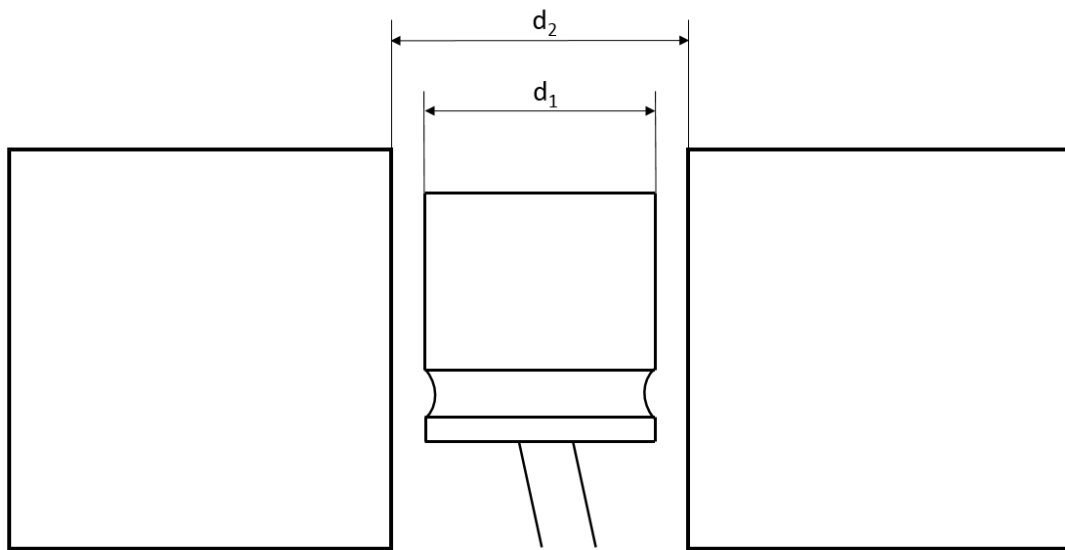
Clearance between an engine piston and a cylinder block. d_1 = diameter of the piston and d_2 = diameter of the cylinder hole in the engine block. The clearance (Y) between the piston and the engine block is $Y = d_2 - d_1$.
